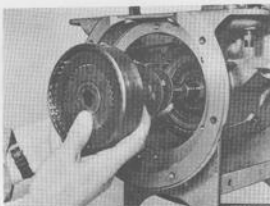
Installation sequence, front clutch cylinder, thrust and backing washers
